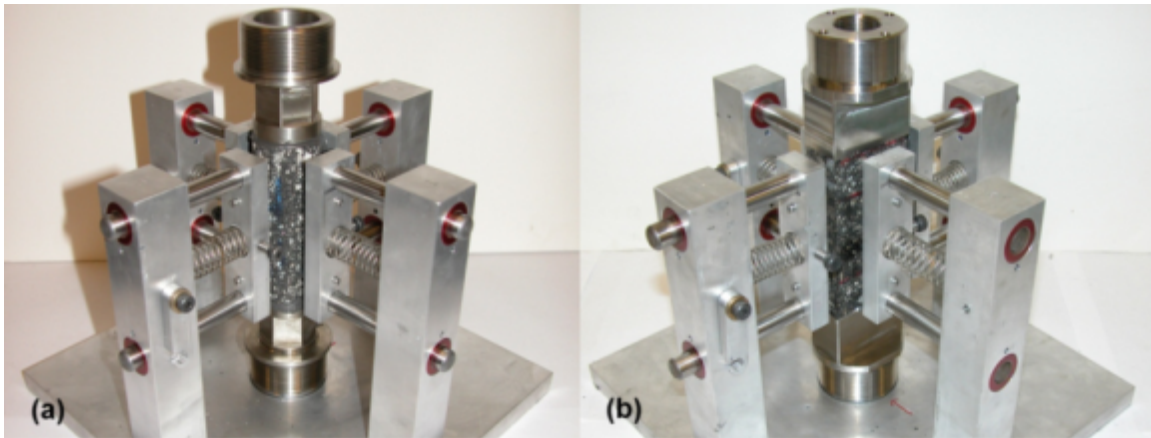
Multi-use target gluing jig: (a) 38 mm diameter cylindrical specimen and (b) prismatic specimen.
